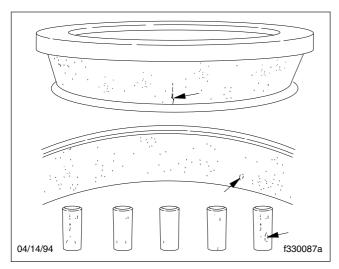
, Indentations, Cracks, or Breaks in Bearing Surfaces
